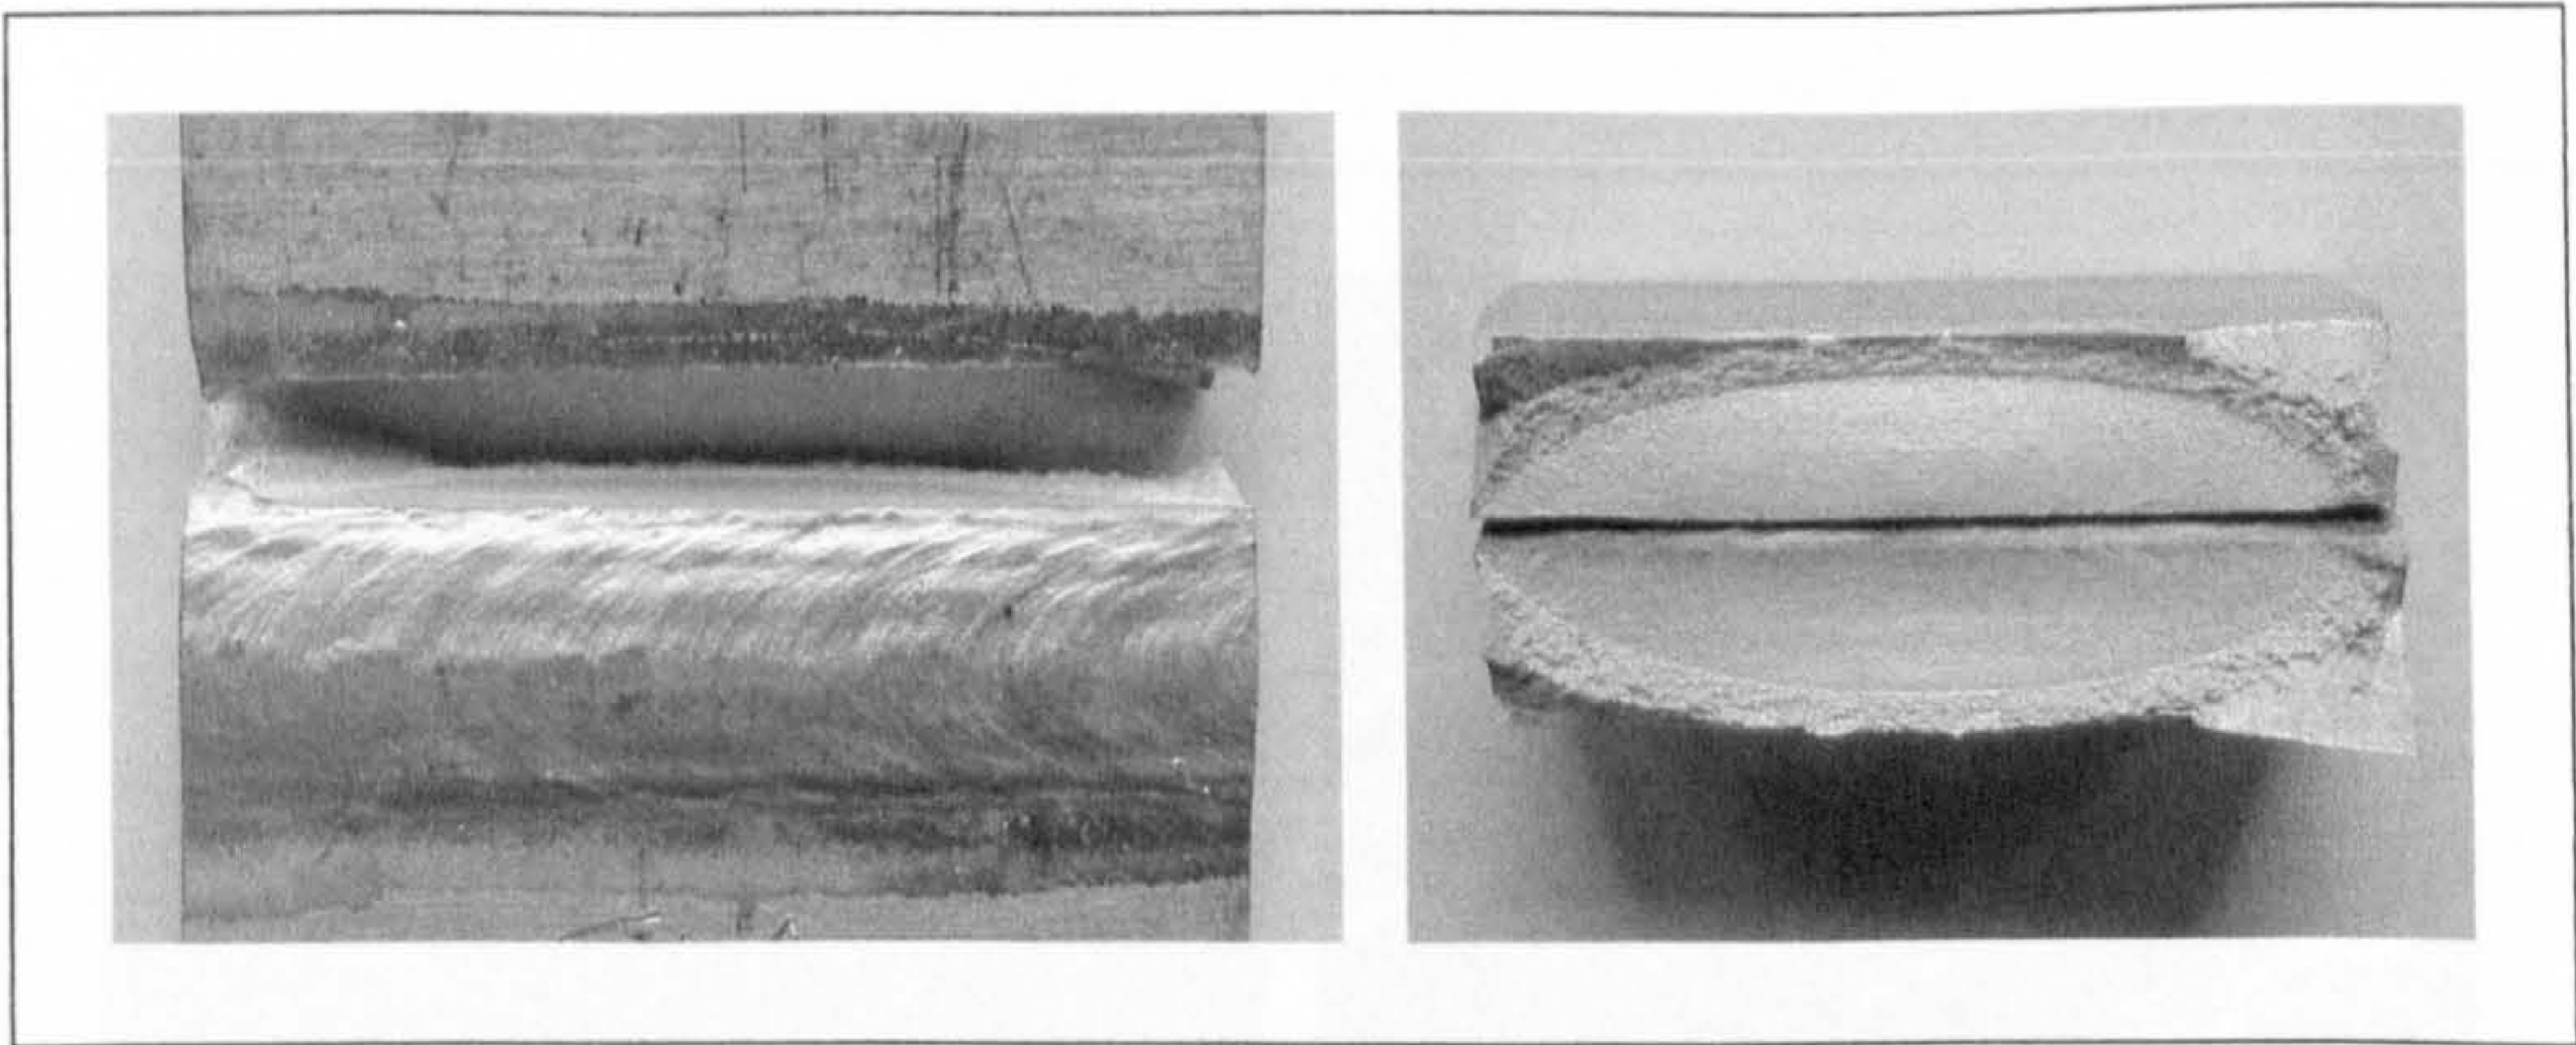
Typical MIG LI crack geometry (left) and fracture surface (right) (MIG LI 8).
